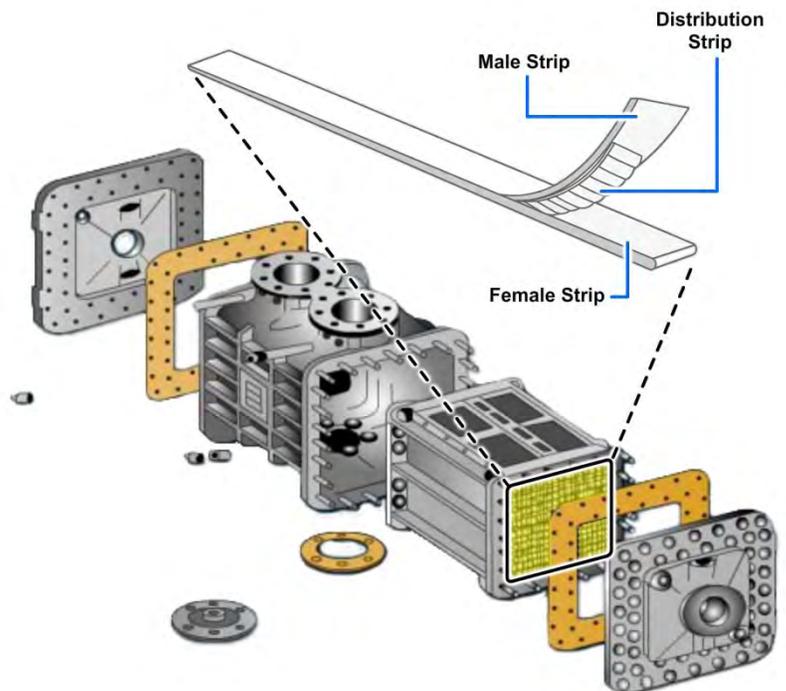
Tube assembly of different strut-tube type coolers.
